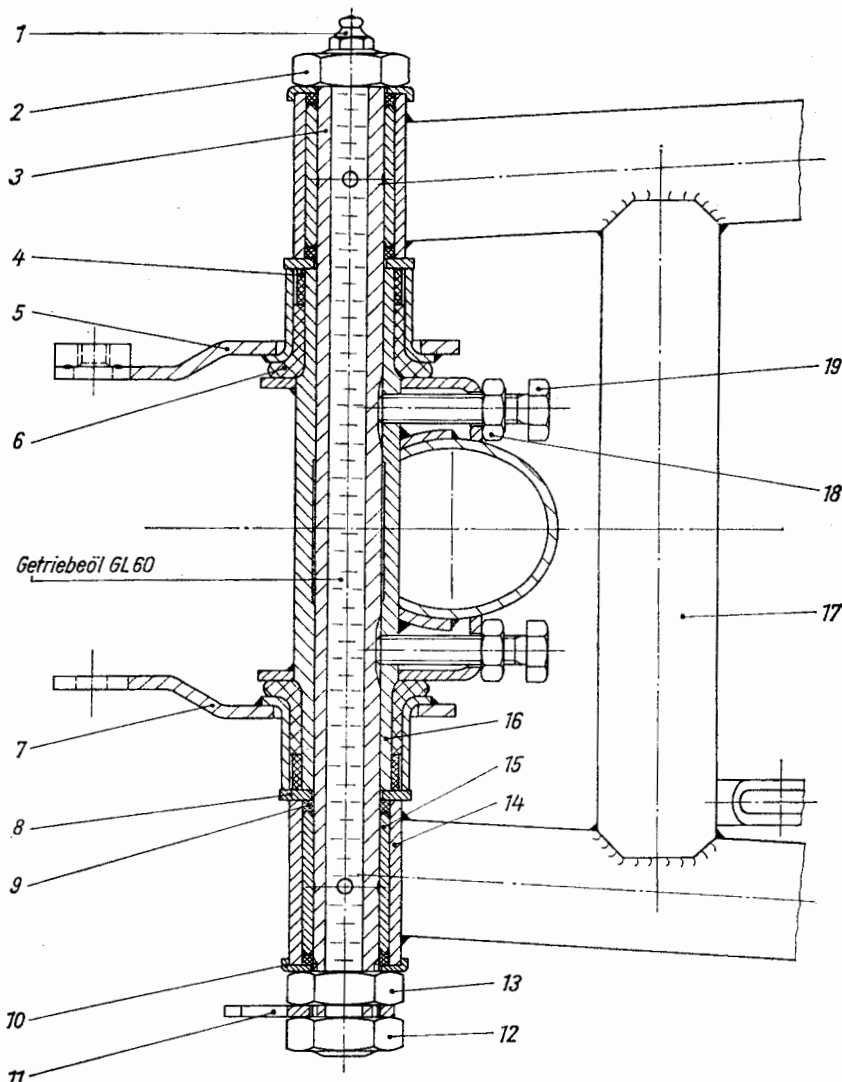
Swing bearing and elastic mounting of the rear engine mounting plates (sectional view)
